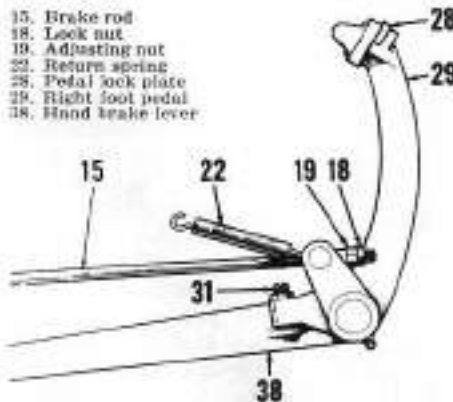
Brake rods (15) are adjusted by loosening lock nut (18) and turning adjusting nut (19); refer to text. Adjusting screw (31) is to maintain pedal alignment so that pedals are equal height in released position.
